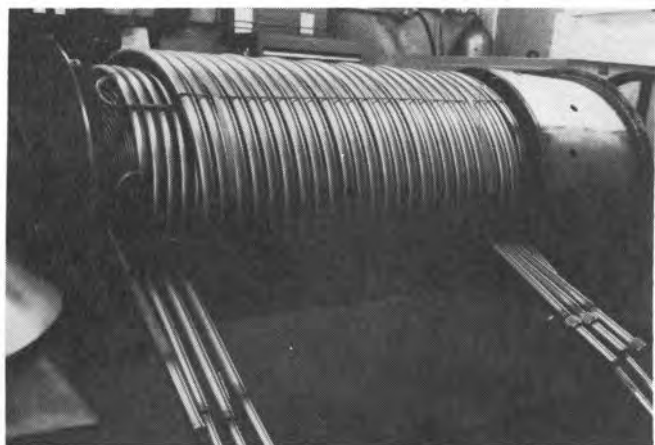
Interior view of a steam generator built by Steam Power Systems, Inc. Hot gases, produced in combustion chamber on right, pass through tube bundle. Tubing extensions shown are temporary, for hydrostatic proof testing (courtesy SPS, Inc.)
